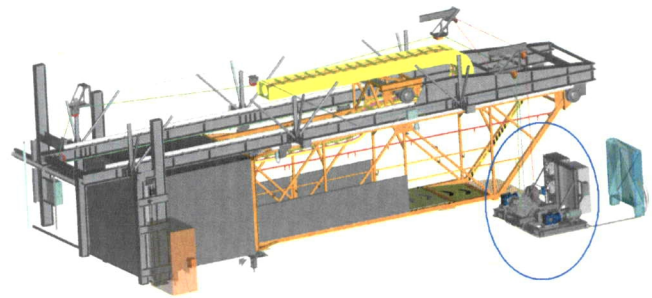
CAA Mechanisms, Actuator Motor “shown in circle”
